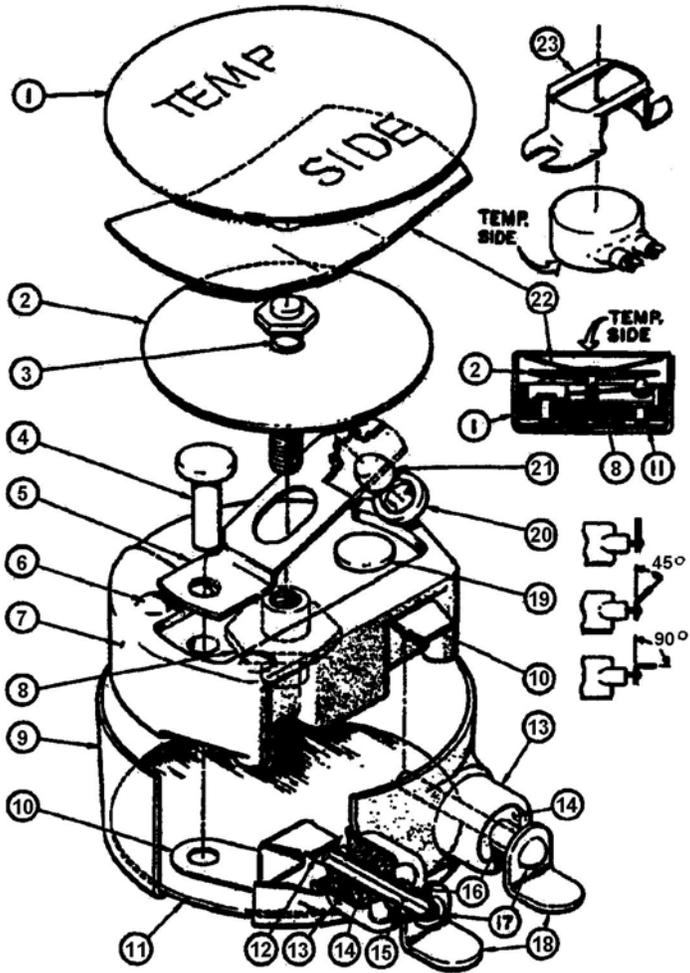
Type C thermal switch exploded and cross-sectional views.
